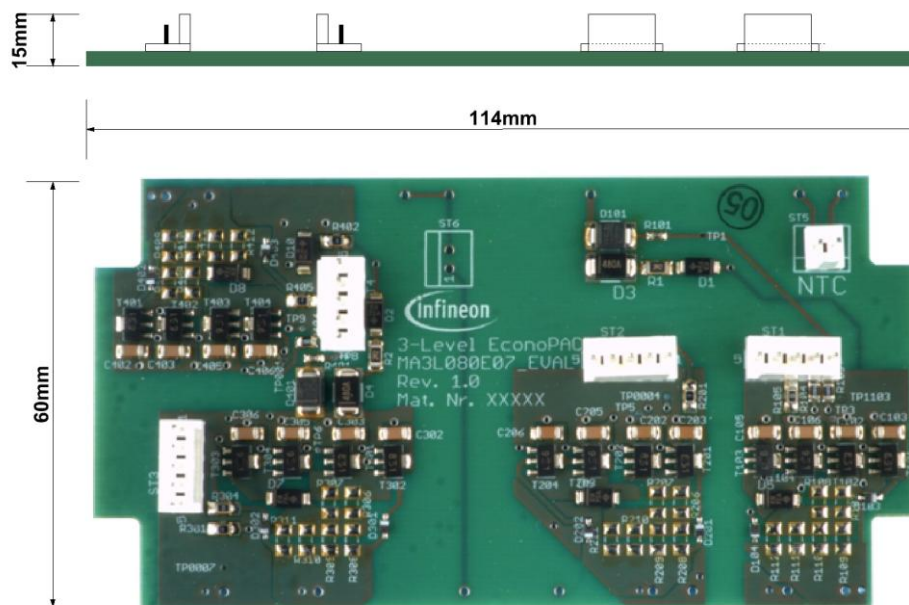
Mechanical dimensions of the MA3L080E07_EVAL
